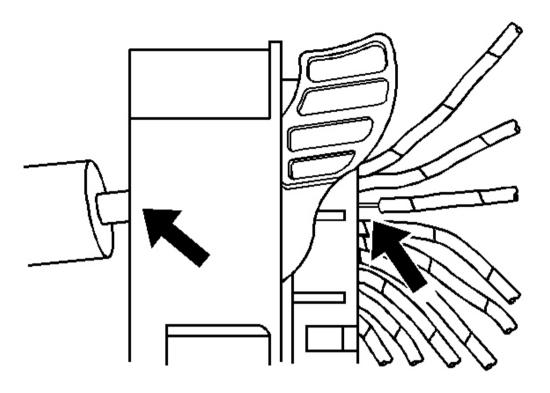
Removing Wire From Back Of Connector Courtesy of GENERAL MOTORS CORP.
